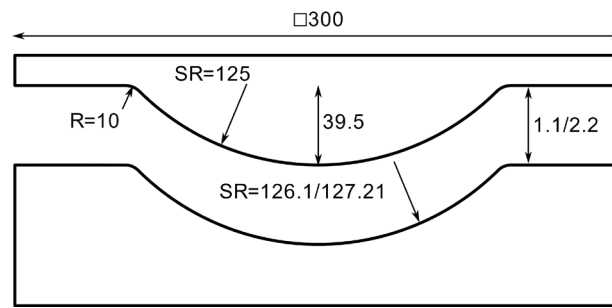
Hemisphere tool set illustration with dimensions in millimeters. A single male punch is used in combination with two female dies for specific nominal cavity sizes.
